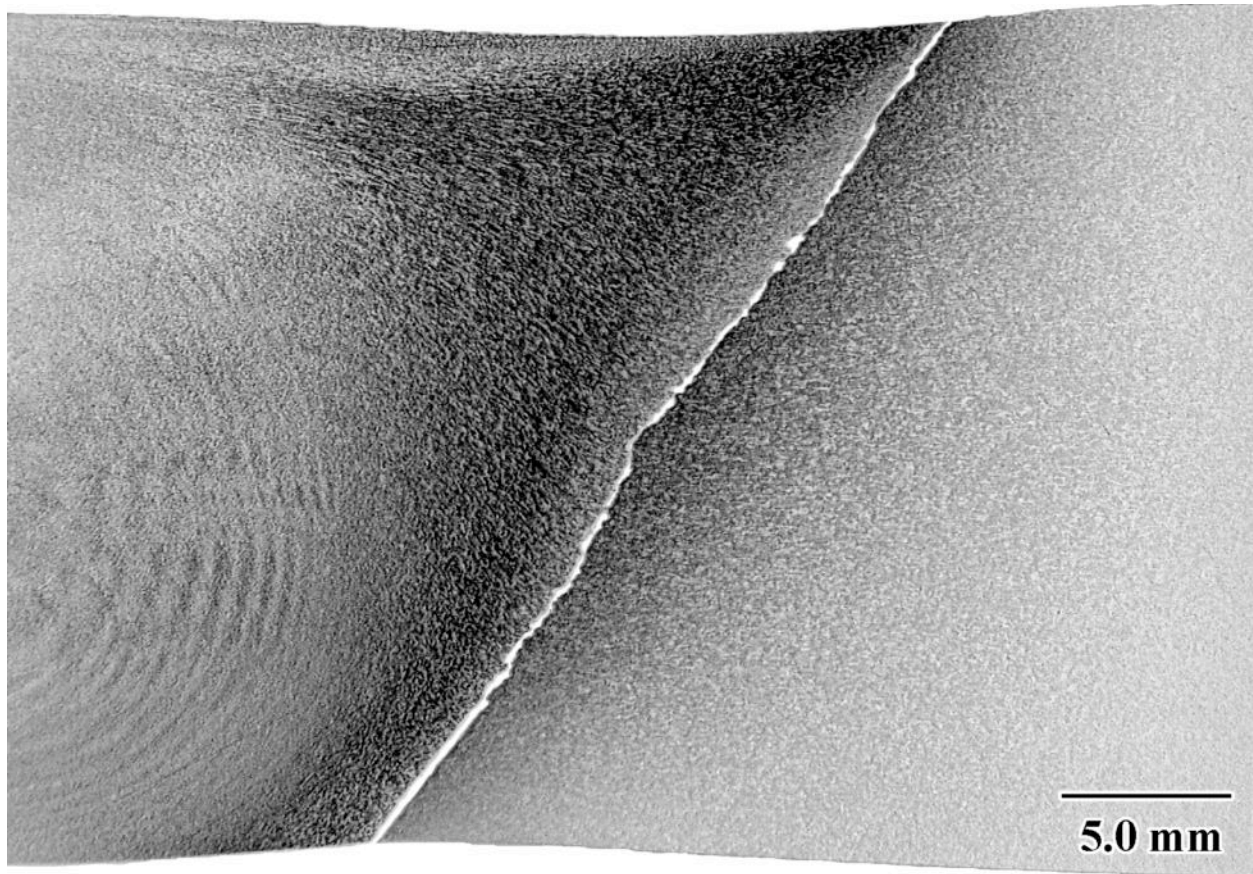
Optical micrograph of fracture location from the whole weld tensile test, showing fracture along the HAZ/TMAZ boundary on the retreating side.
